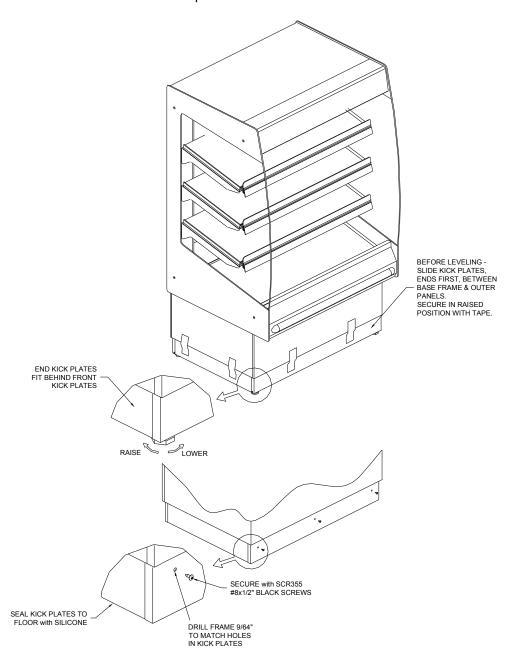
Floor Model - Leveling & Kick Plate Mounting
